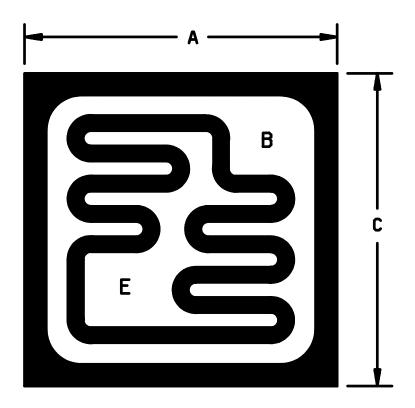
Physical dimensions (similar to TO-5 and TO-39).
